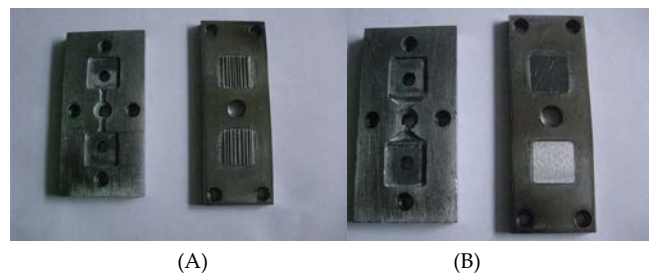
(A) THE INJECTION MOLDING TOOL FOR THE FIRST SHOT (B) THE INJECTION MOLDING TOOL FOR THE SECOND SHOT
